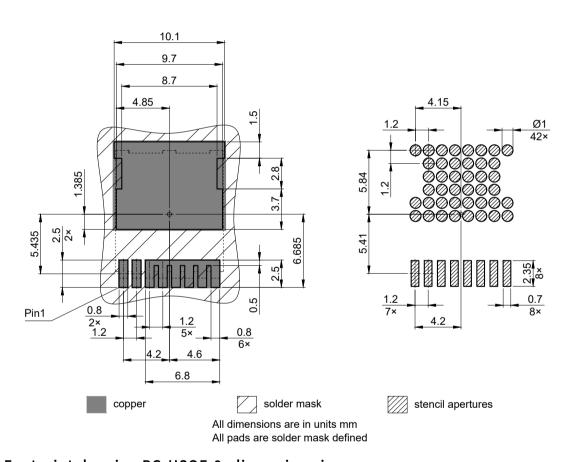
Footprint drawing PG-HSOF-8, dimensions in mm
